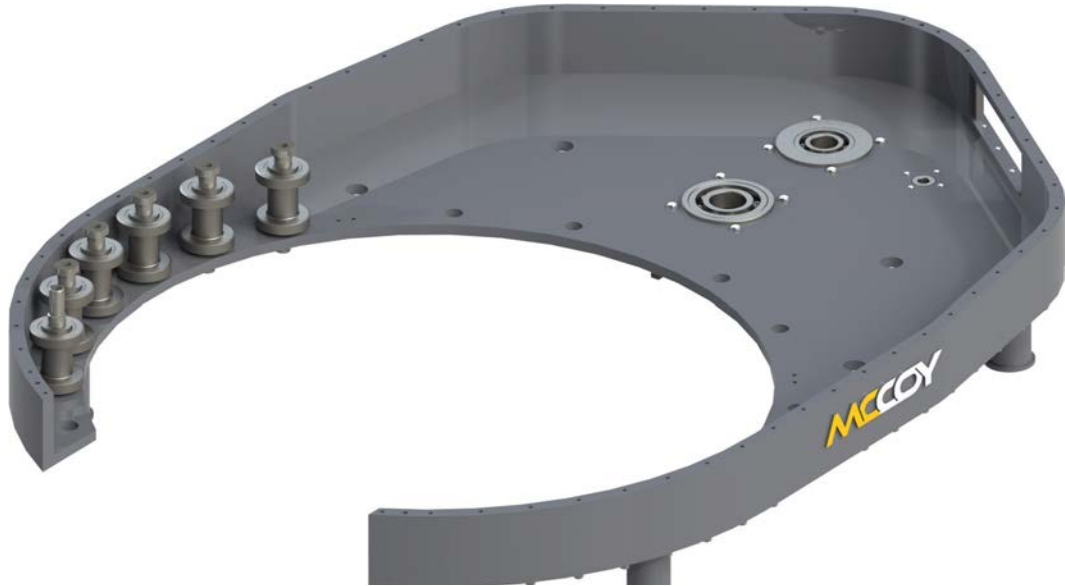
Tong Assembly - Lower Bearing Cap Installation
